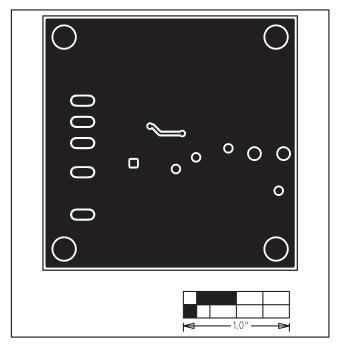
MAX9820 EV Kit PCB Layout—Solder Side
